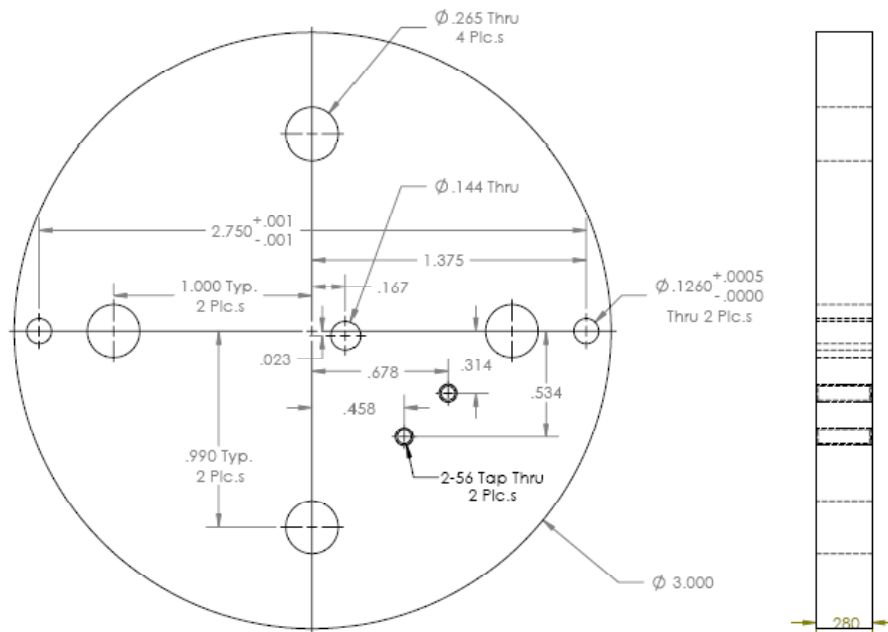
CAD drawing of the testing jig lid for hybrid actuation testing.
